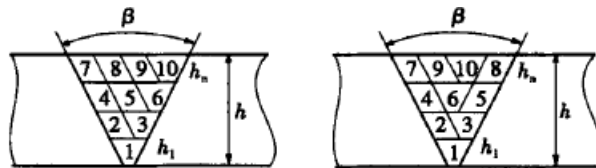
Welding sequence of single-sided V-groove, Zhang et al. (2009)
